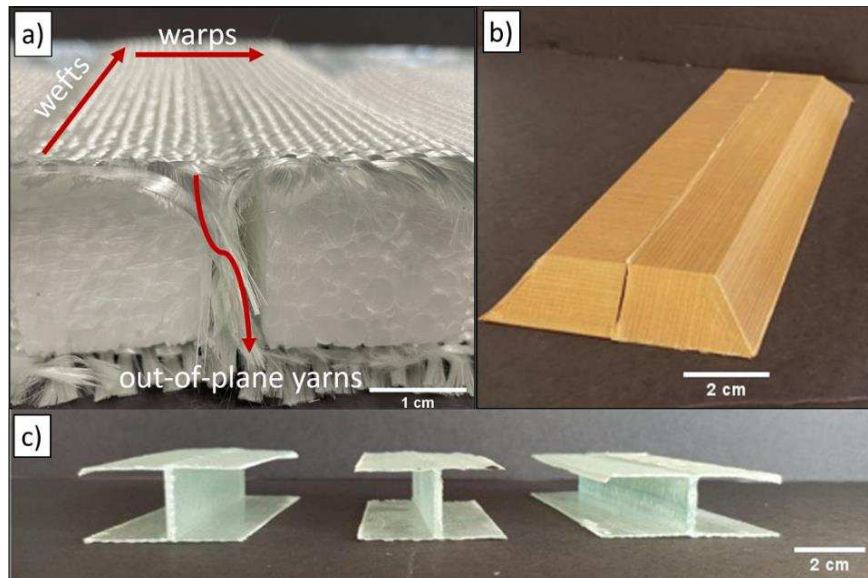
IBCs were produced by VIP method with custom-designed molds that support the flanges of I-beam preforms. a) 3D woven spacer fabrics in I-beam form, b) custom-designed Teflon-coated molds, c) manufactured IBCs
